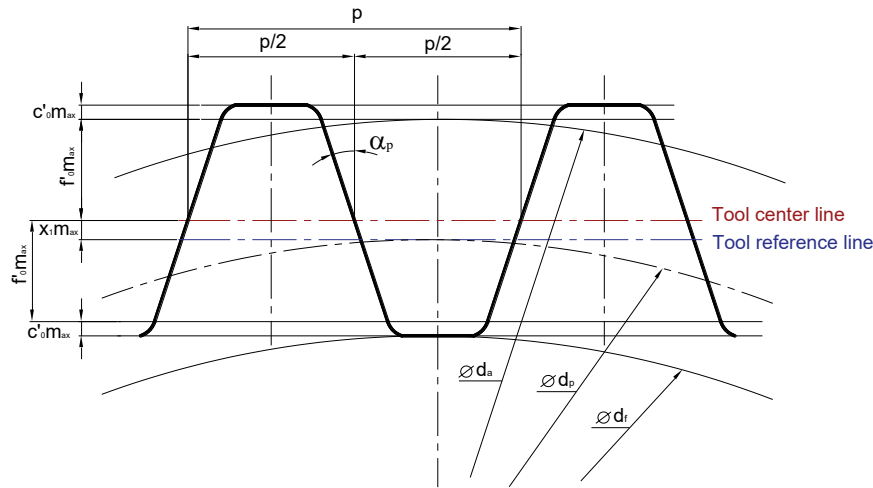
Tool basic rack gear tooth profile in the case of involute gear having normal teeth
